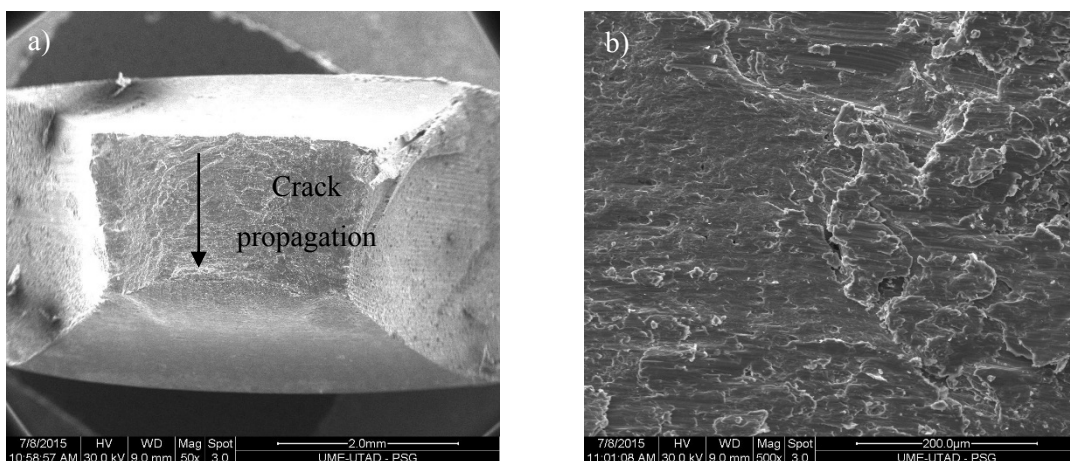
Fracture surface of a plane shear specimen of X60 piping steel, tested under ULCF regime: a) crack propagation path; b) close view of the fracture surface.
